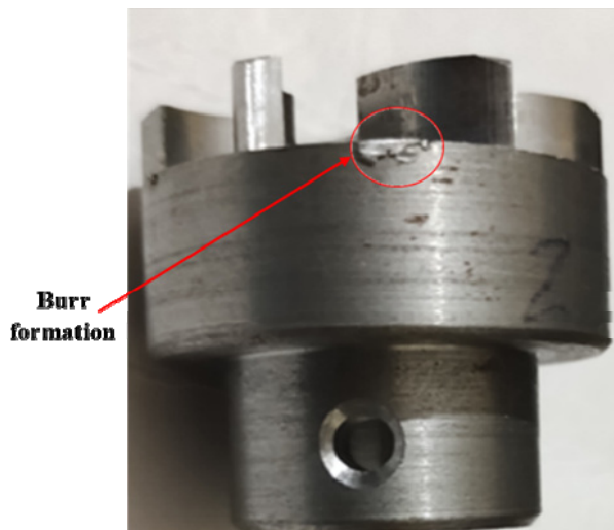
Burr formation at the corner edge of the rotor due to tool wear
